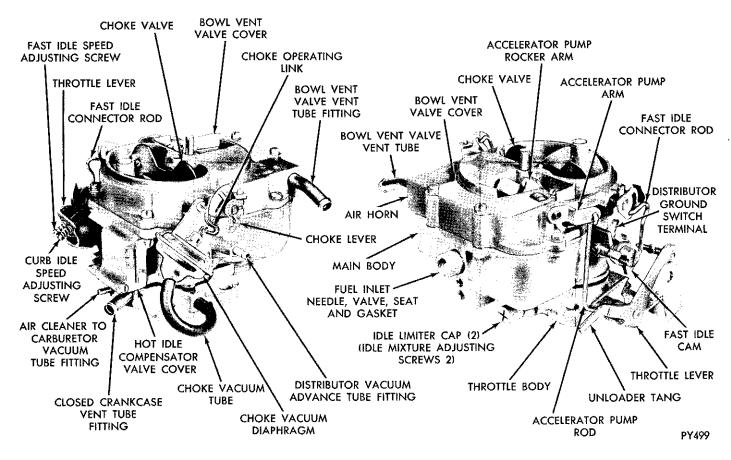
Carburetor Assembly (BBD 1-1/2 inch) E.C.S.
